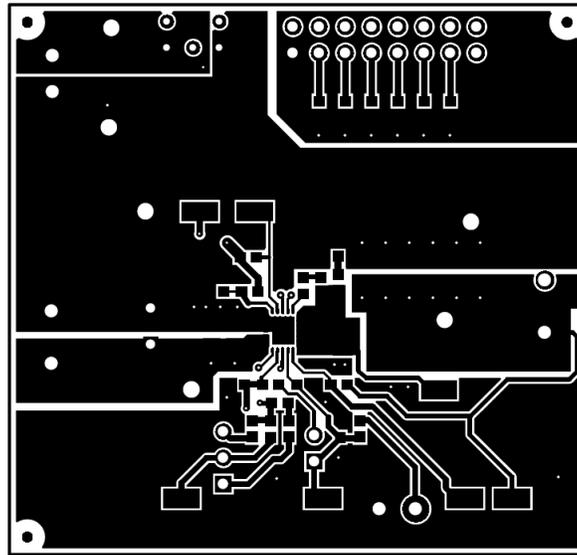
TPS53317AEVM-726 Top Copper (Top View)
